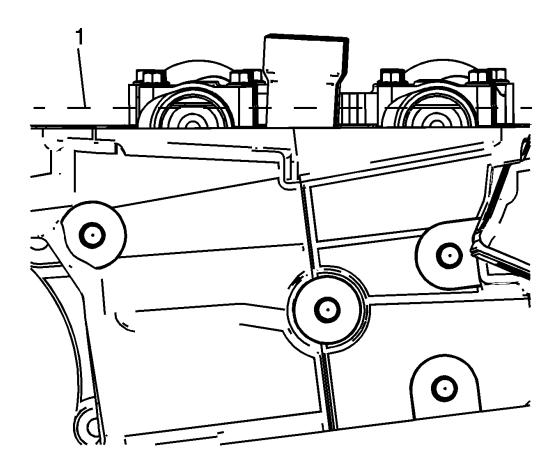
View Of Camshaft Flats Parallel With Camshaft Cover Rail Courtesy of GENERAL MOTORS COMPANY
